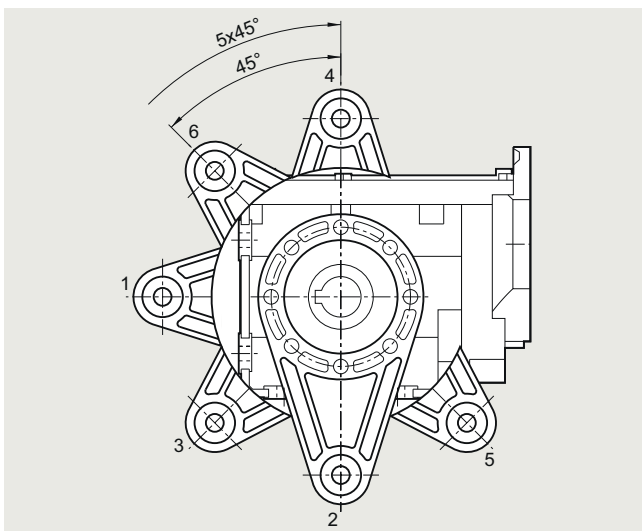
/7 Bevel gearboxes BAD., sizes 19 and 29
